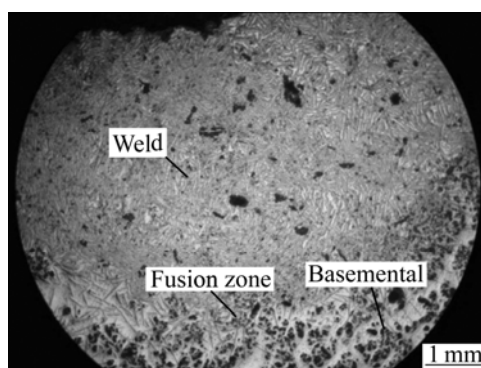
OM macrostructure of welded joint with Ti-60Al alloy sheet filler
